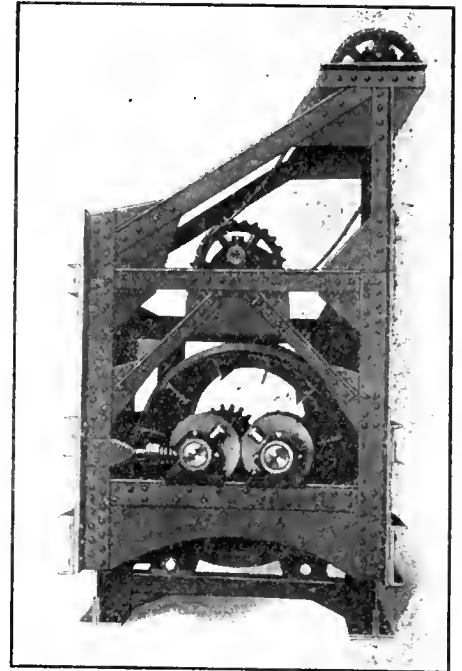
SPECIAL SAND MACHINE FOR STEEL FOUNDRIES.
